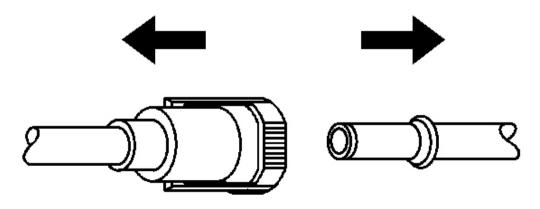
Pulling The Connector Apart Courtesy of GENERAL MOTORS CORP.
